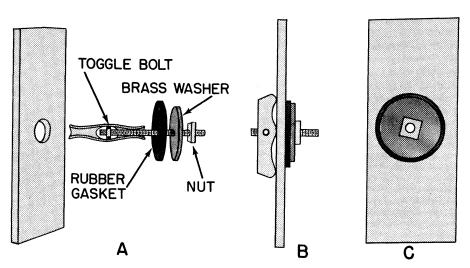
Closing a hole in a tank: A, The link of the toggle bolt is passed through the hole in the tank (hole is enlarged if necessary). B, Side view of tank edge (nut is drawn up tightly to compress washer and gasket against tank). C, Outside view of completed repair.
